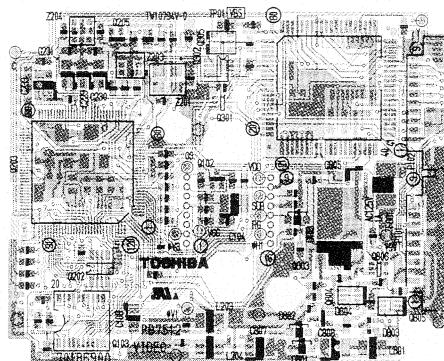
U501 Camera PC Board (Top Side)
